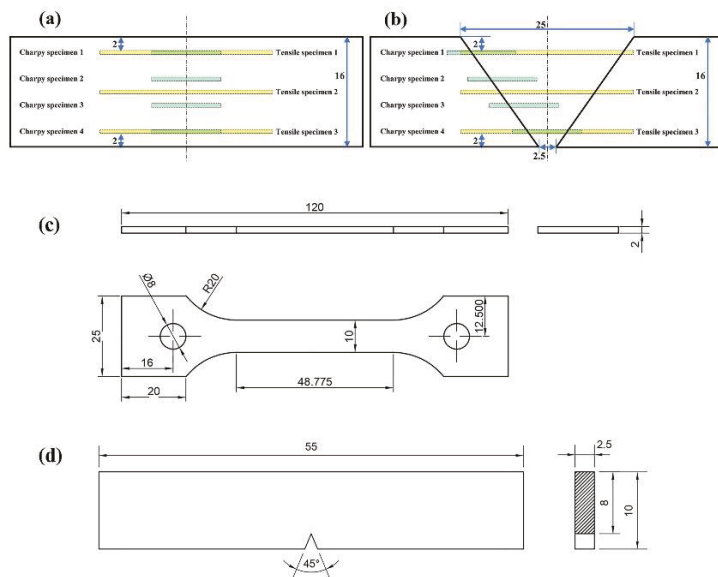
Dimensions of grooves shape (a) LBW joint (b) SMAW joint (c) Tensile specimen (d) Charpy specimen (Unit: mm).
